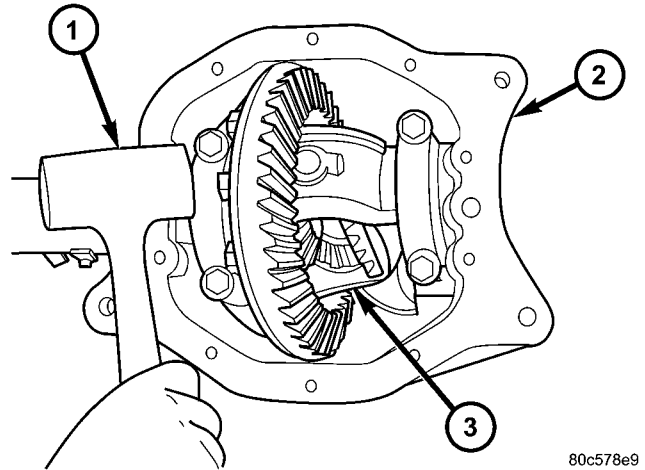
SEAT DUMMY BEARINGS PINION SIDE
